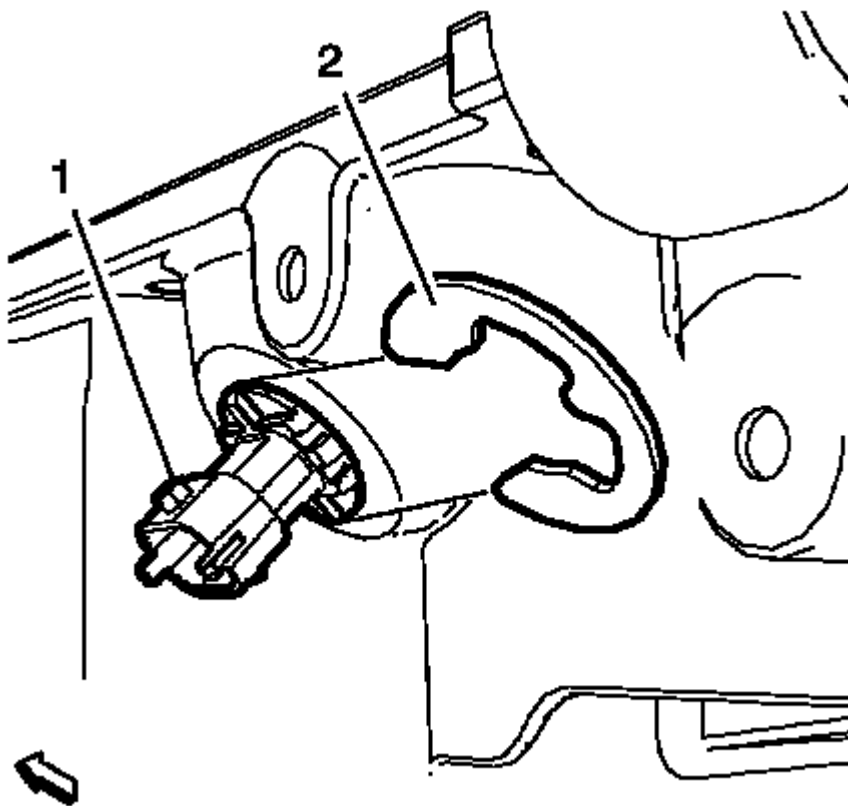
Engine Oil Level Sensor Wiring Harness Plug & Clip
